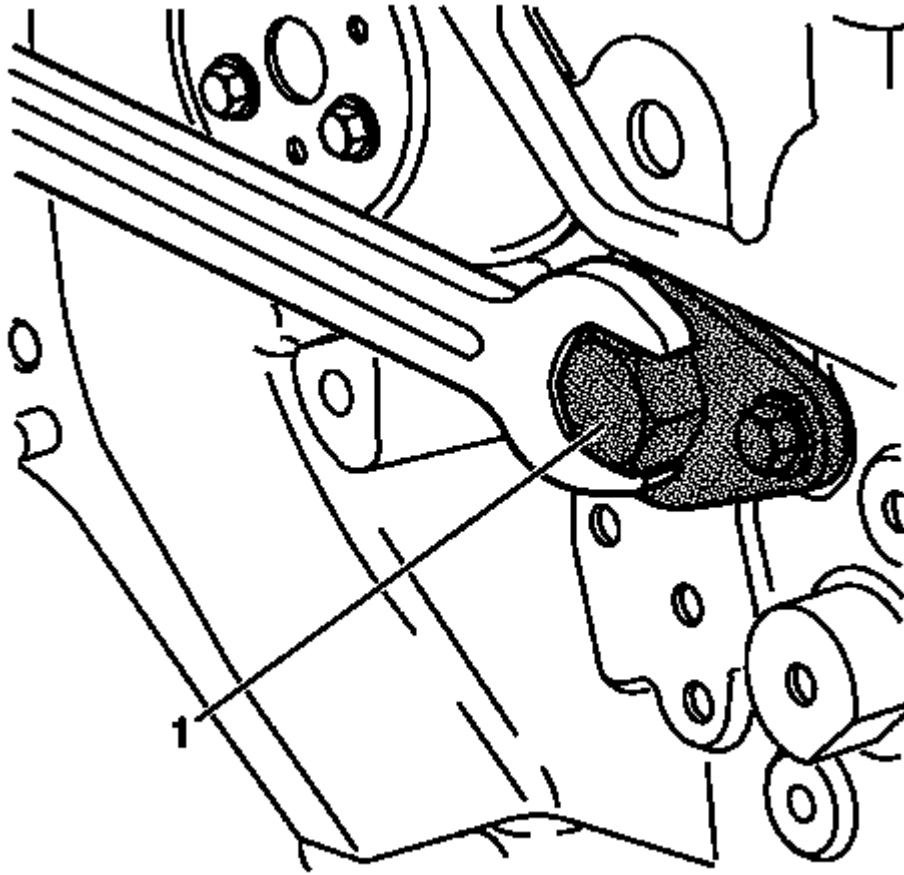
Seat Balance Shaft Bushing Into Bore Using Balance Shaft Bushing Remover/Installer
